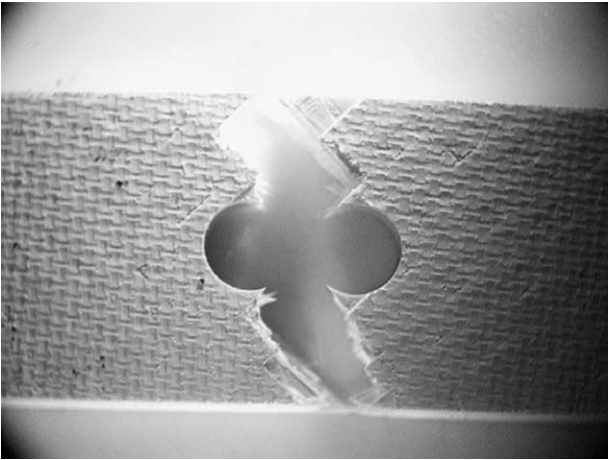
Fracture surfaces of samples with  $\pm 45^\circ$  fibre orientation after 100 h heat-treatment at 1100 °C.
